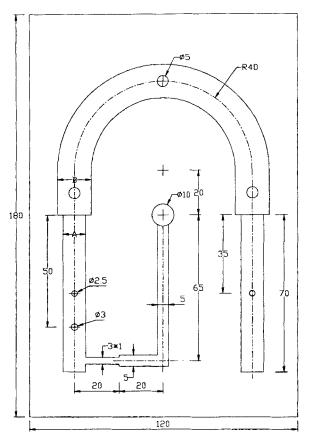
Sketch of the mold geometry showing the cavity unit: mm, for gas-assisted molding of circular tubes with dimensional transitions and curved sections.
